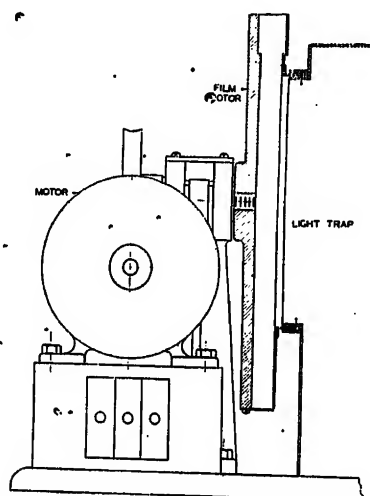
SCALE DRAWING OF ROTATING LIGHT TRAP
